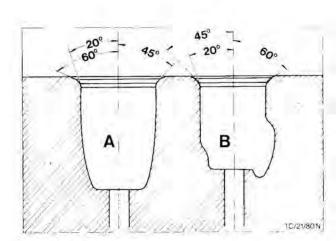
Valve seat angle A - inlet valve seat B - exhaust valve seat
